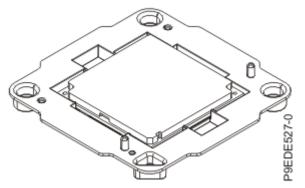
Placing the bottom of the system processor module tray so that the guide pins face upwards
